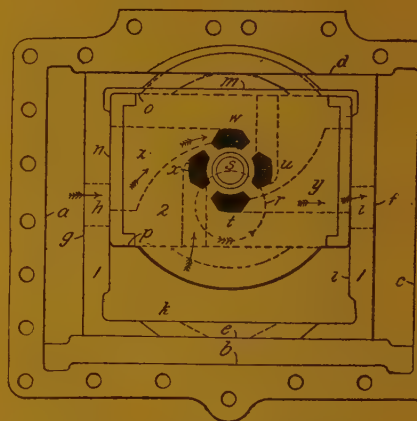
Side elevation of Elvin stoker engine with cover removed.
